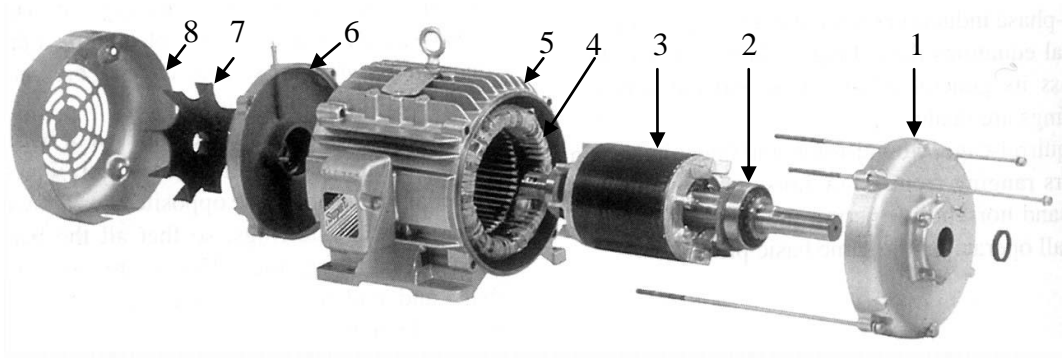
Exploded view of an induction motor. (1-Front end shield, 2 - Bearing, 3 – Cage rotor, 4 - Stator, 5 – Housing, 6 – Rear end shield 7- Cooling Fan, 8- Fan Cowl) (Wildi, 2002)
